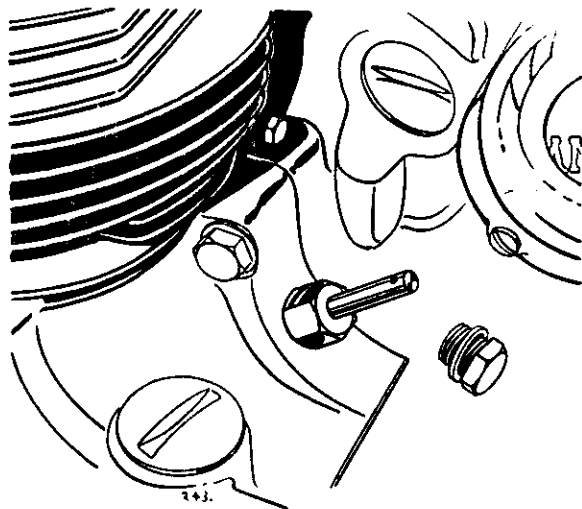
FIG. C. T.D.C. LOCATION TOOL D571/2 IN POSITION (FROM ENGINE No. H35987)
